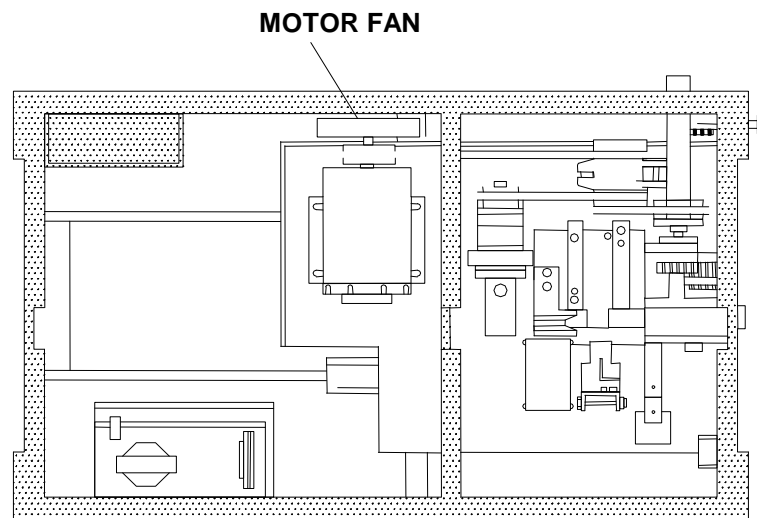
MAJOR COMPONENTS,TOP VIEW
